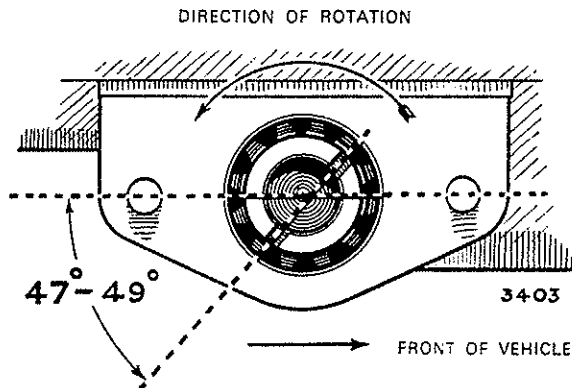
Showing the correct assembly of the oil pump with No. 1 cylinder at T.D.C. firing position
